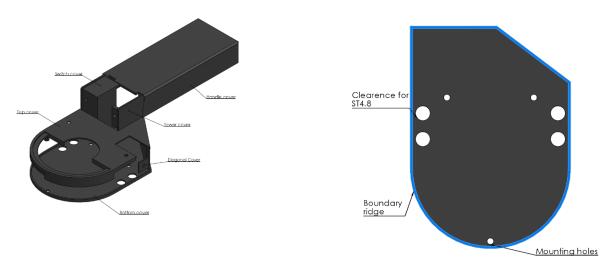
(Left) Assembly showing plastic covers (Right) Bottom plastic cover
